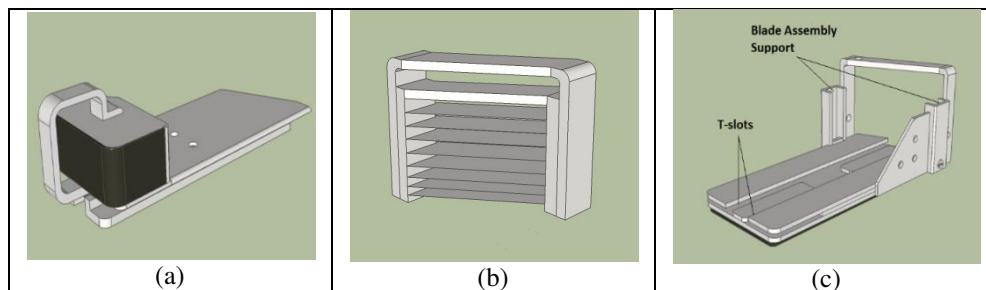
Perspective views of (a) Pusher assembly; (b) Blade assembly; and, (c) Base assembly.
